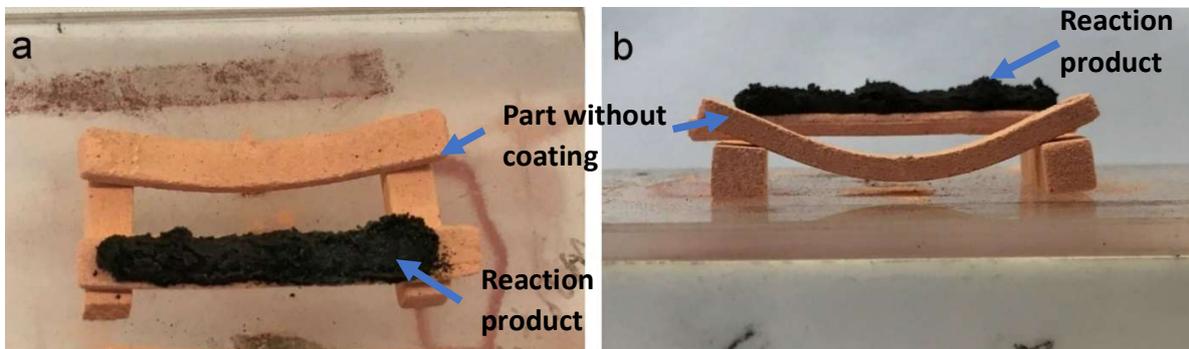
A sintered part with coating showed no part sag, whereas the part without coating sagged significantly, (a) top and (b) side view (photo was taken from opposite end of Figure 7b for clear representation).
